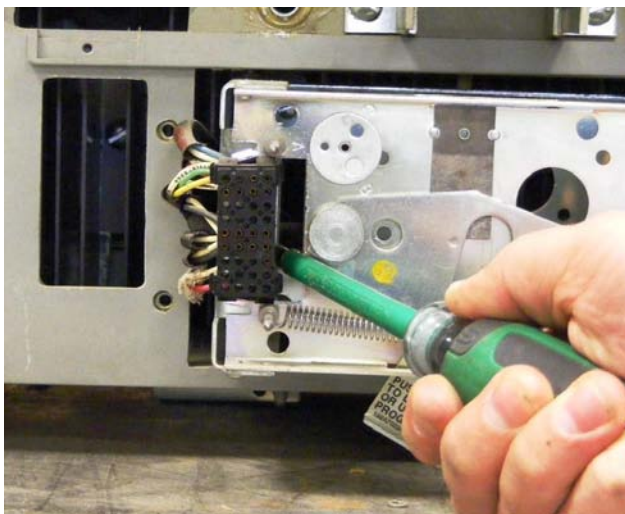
, REMOVING THE CONNECTOR HOUSING
